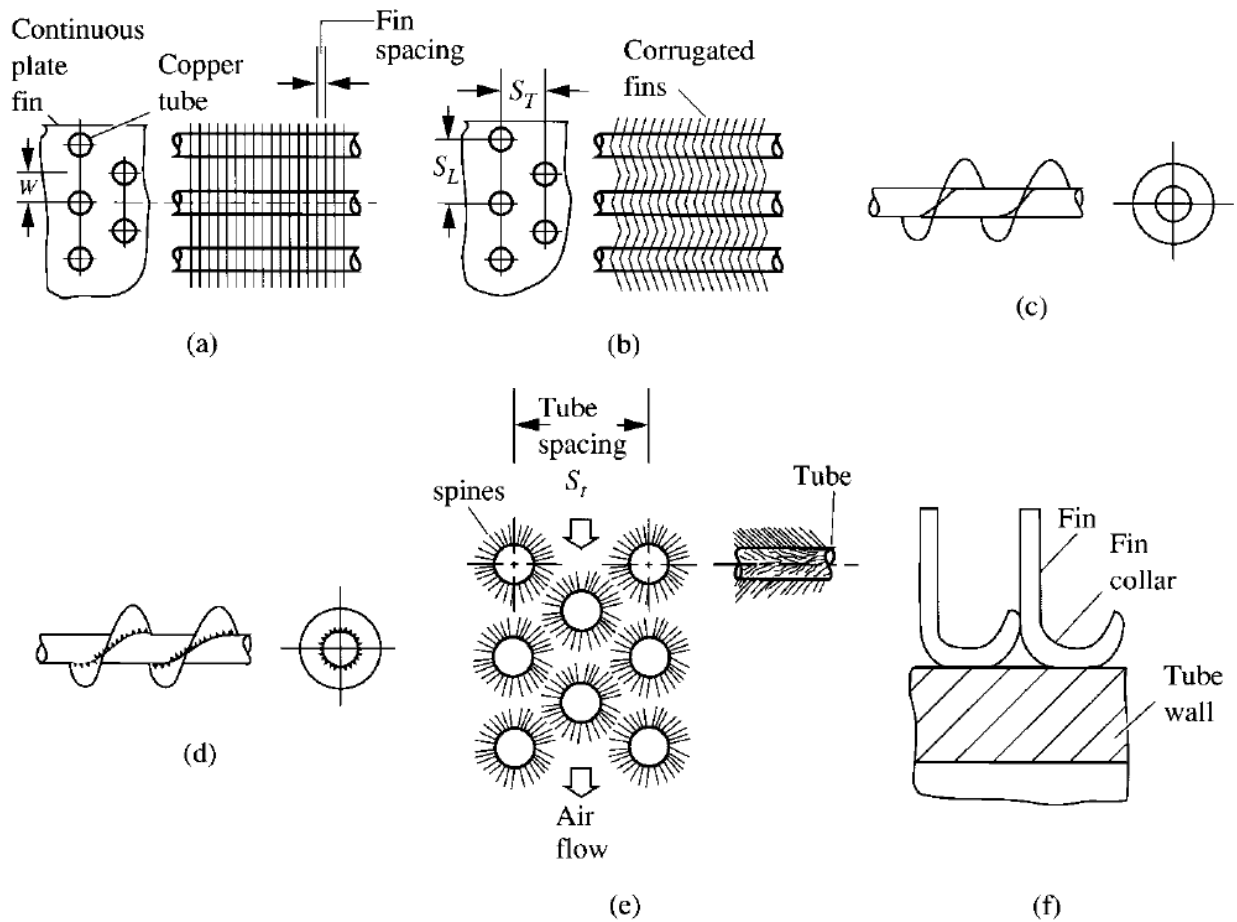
Types of fins (a) continuous fin plate; (b) corrugated fin plates; (c) smooth spiral fins; (d) crimped spiral fins; (e) spine pipe; and (f) fin collar and tube bonding
